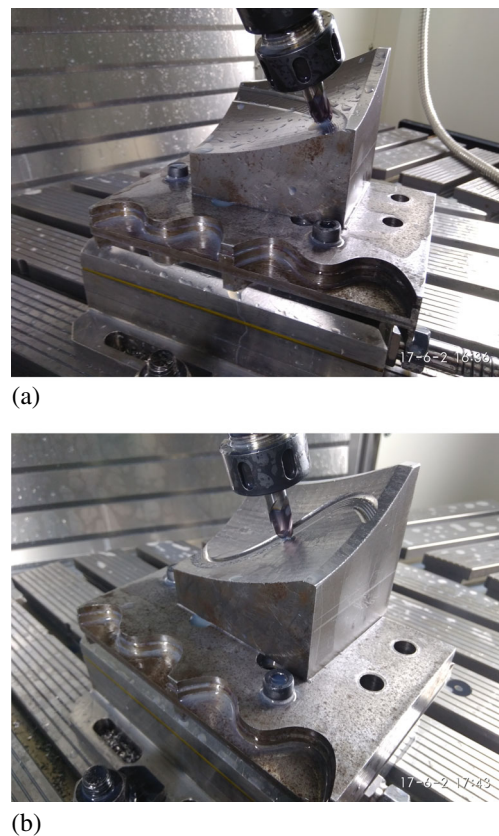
Five-axis ball end milling experiments of sculptured surface. a Z-constant machining. b Sinusoidal machining
